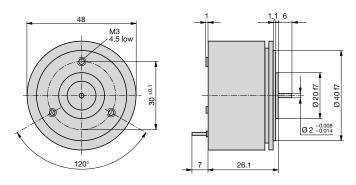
KINAX 3W2 with shaft dia. 2 mm, length 6 mm, standard version.
